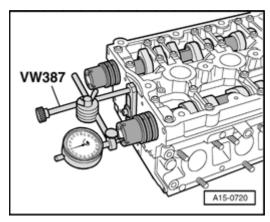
Securing Dial Indicator To Cylinder Head Using VW387 Dial Gauge Holder Courtesy of VOLKSWAGEN UNITED STATES, INC.
